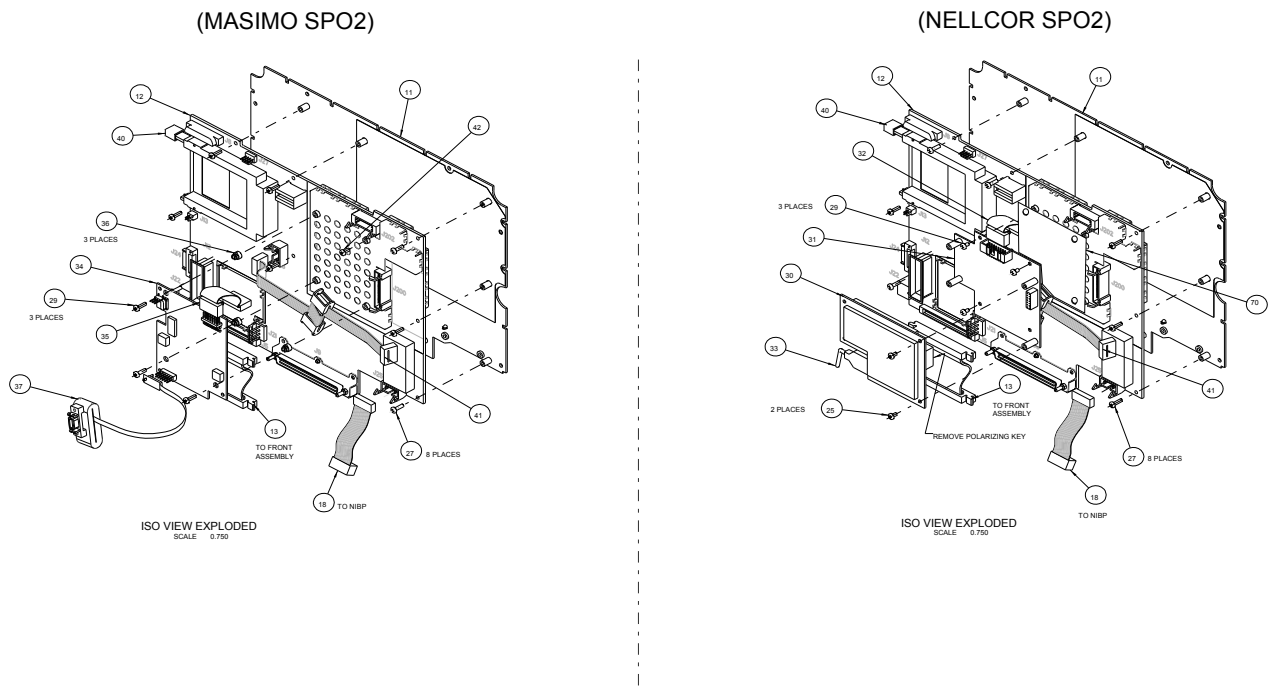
Main/Rear Assembly (P/N 0998-00-0170-XXXX)
